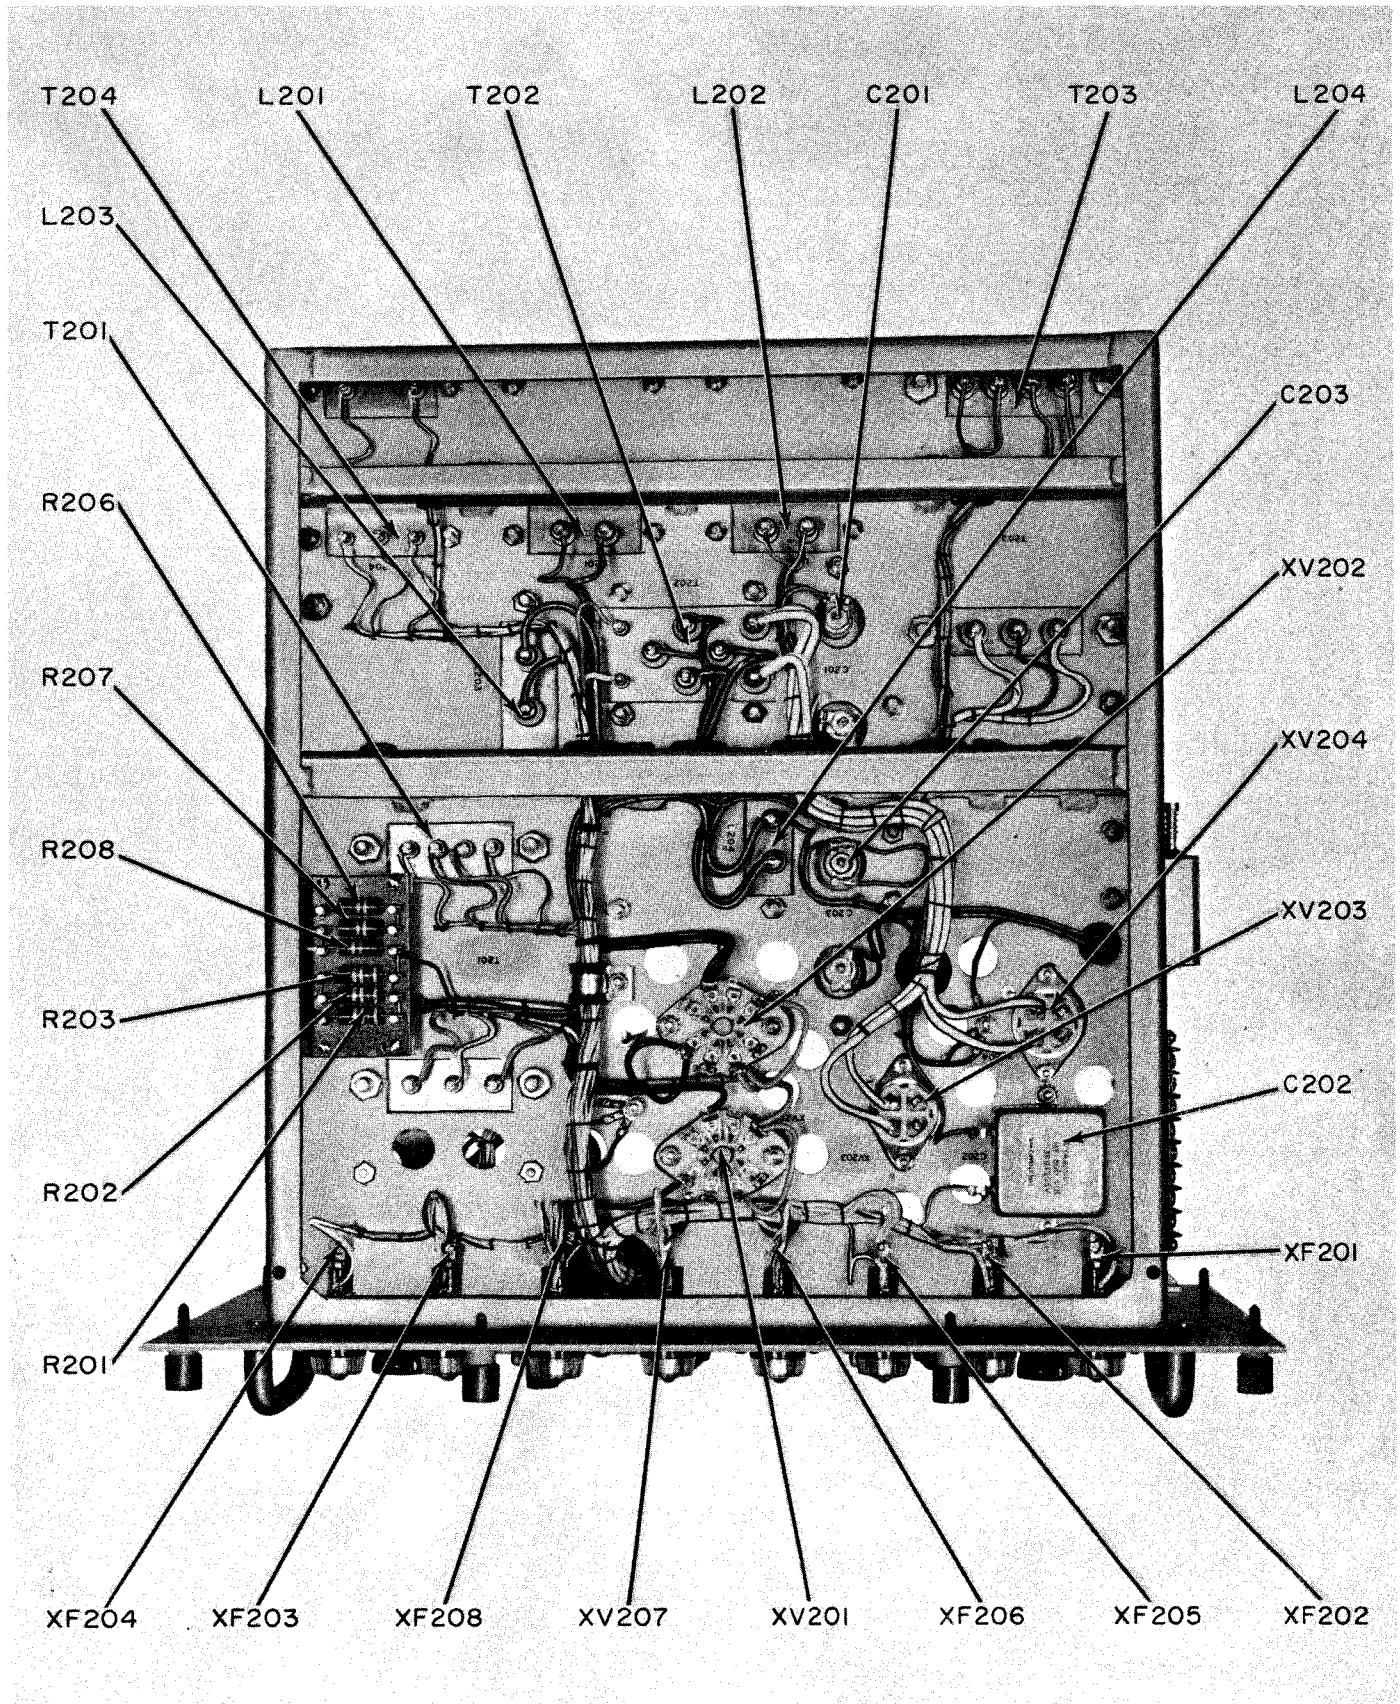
Power Supply PP-1294(XN-1)/SRT-17, Bottom View
